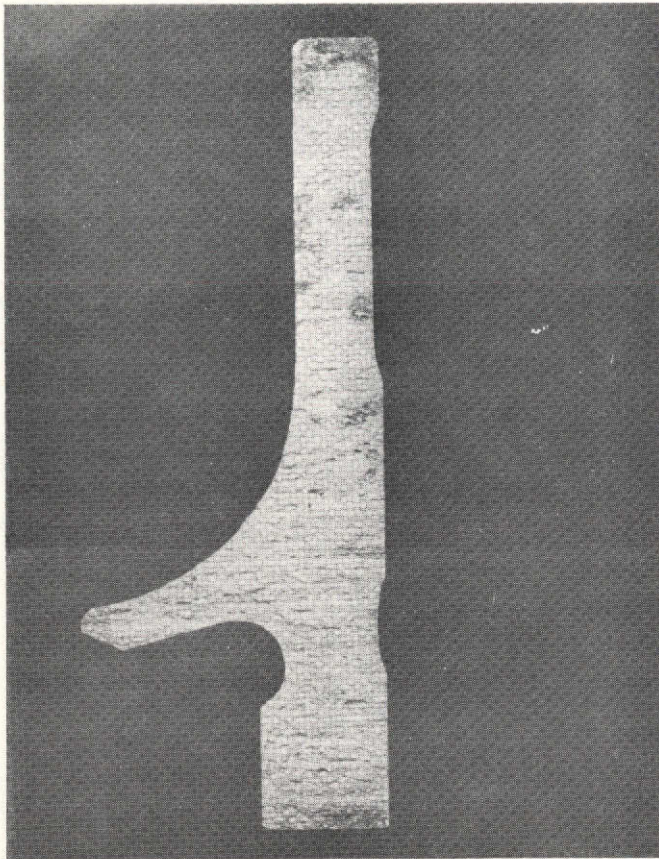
Oil Dam and Heat Shield, Crack Surface.
